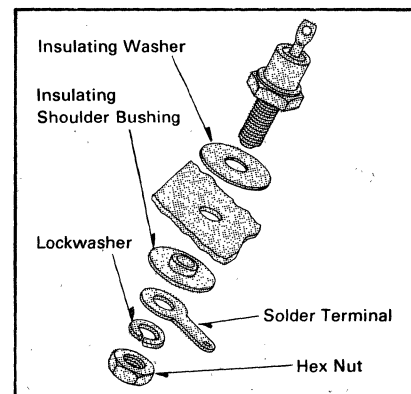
C: Typical Insulating Hardware Kit Assembly.
